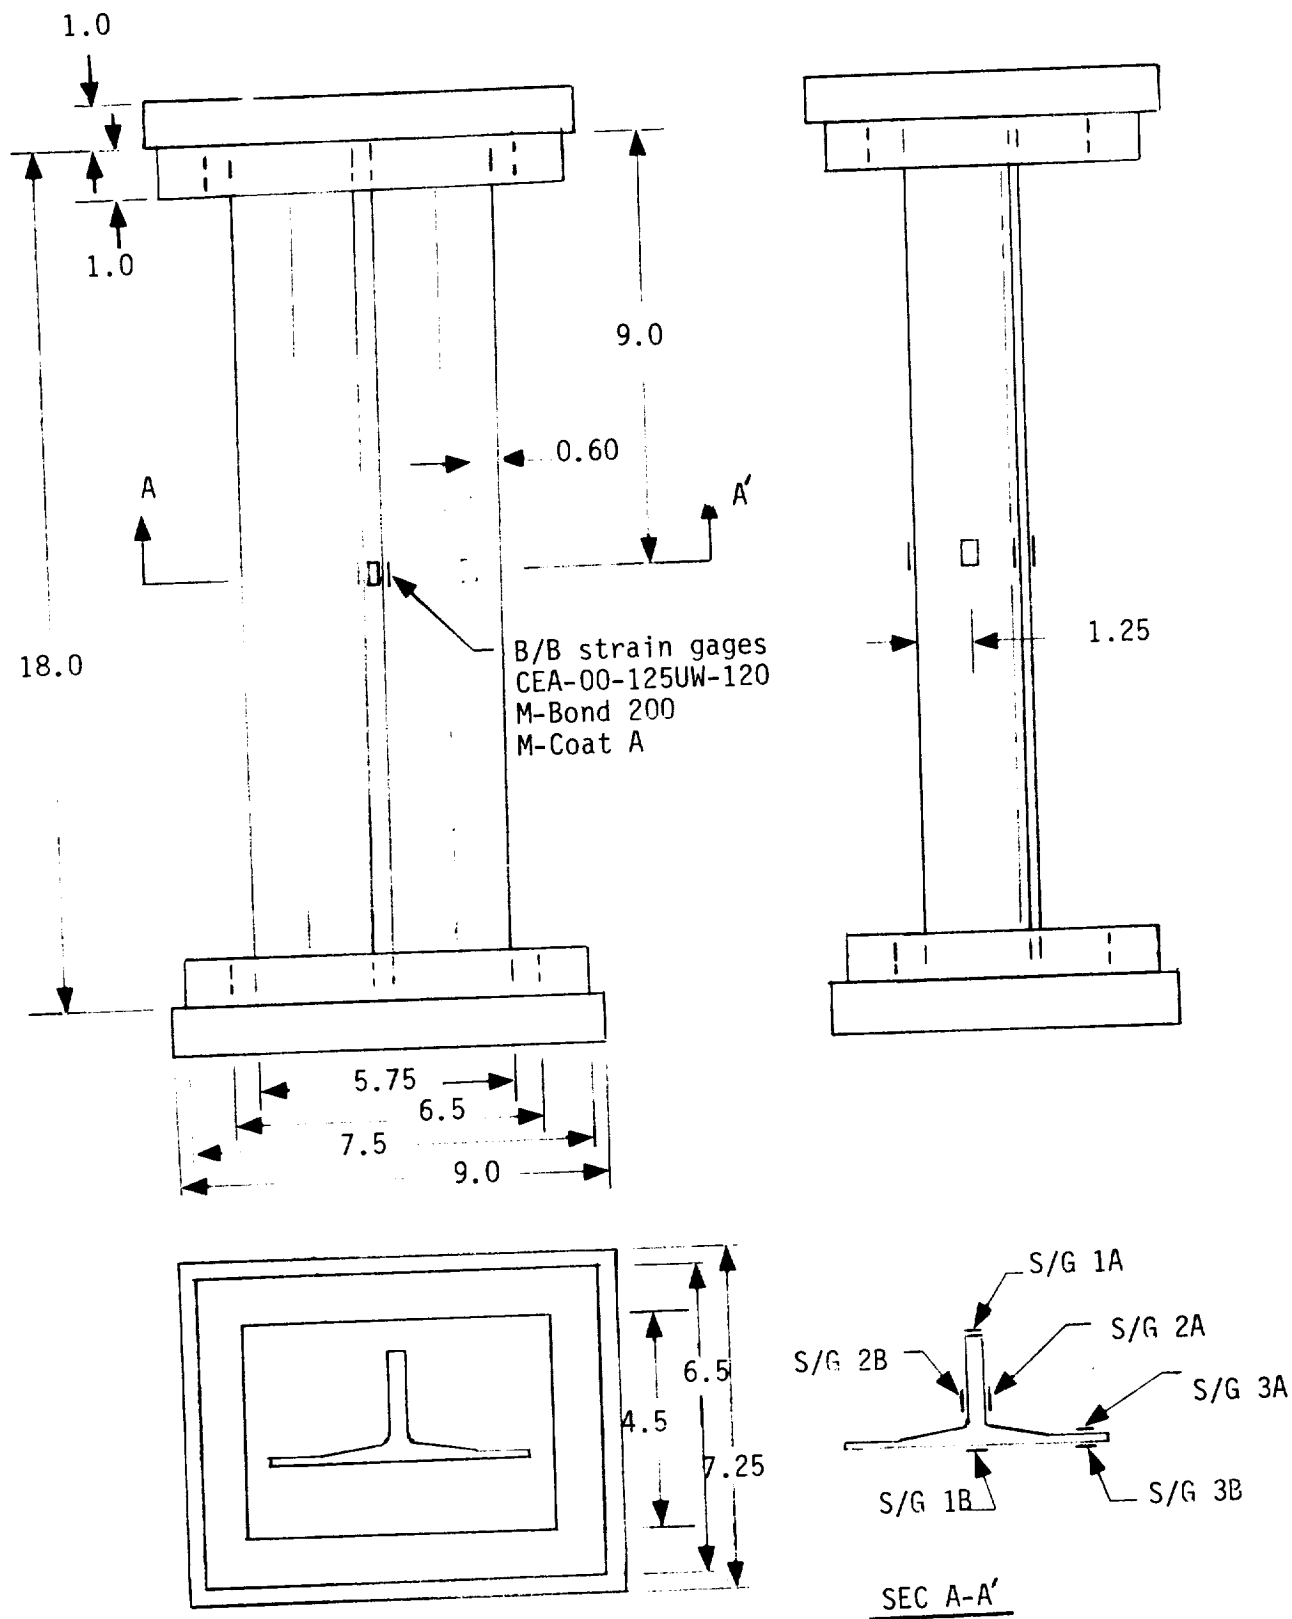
Undamaged stiffener panel test configuration and strain gage layout.
